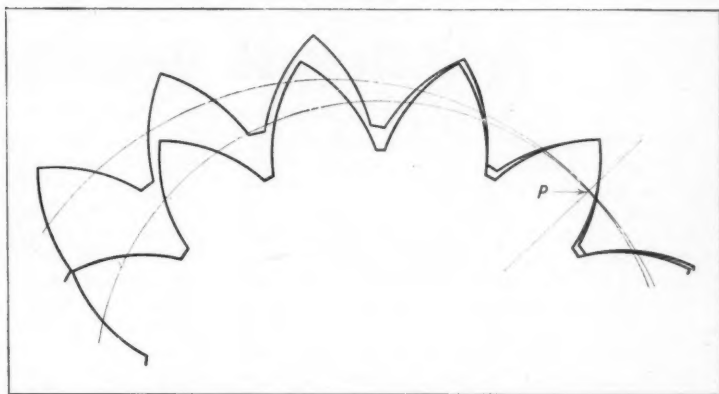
Disengagement condition for an involute internal gear pair with 16 and 13 teeth of 36-deg. pressure angle
